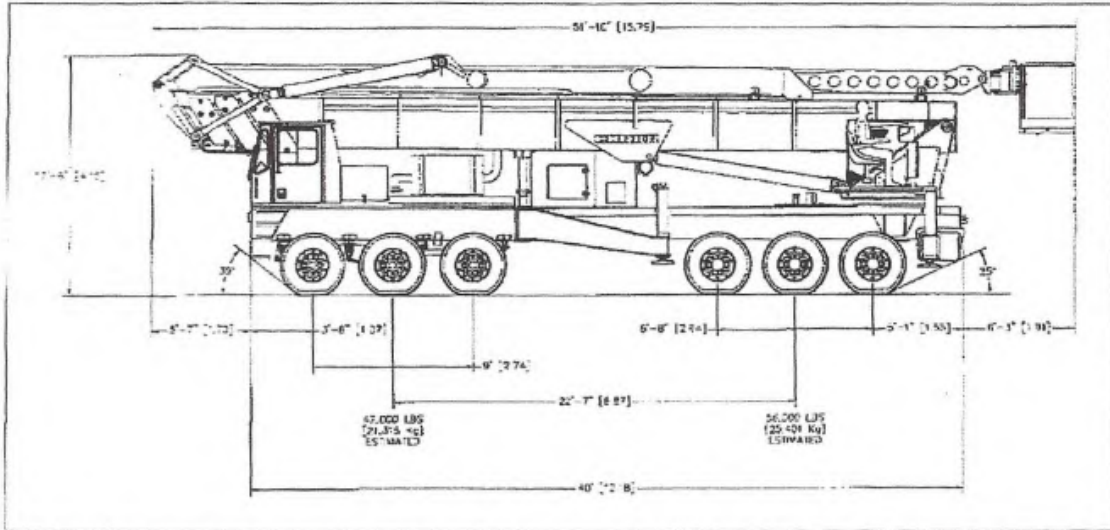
Example Aerial Lift Crane to be Used During Construction (Roadable Length 52 Feet; Width 8 Feet 6 Inches)
